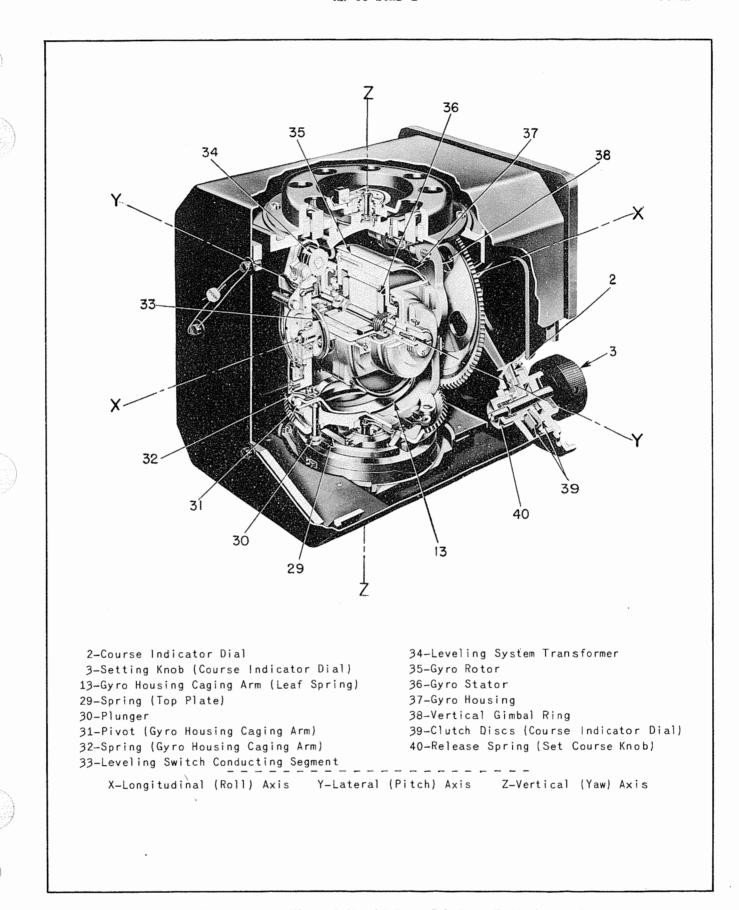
Cutaway View of the AF Type C-1 Turn Indicator - Rear
